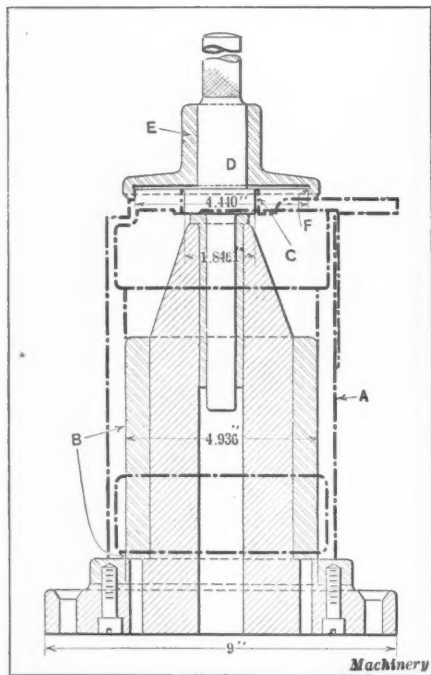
Gage for inspecting Concentricity of a Bore with a Hub
